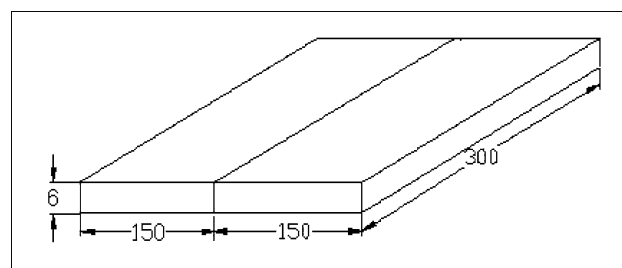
Dimensions of square butt joint configuration (all dimensions are in mm)
